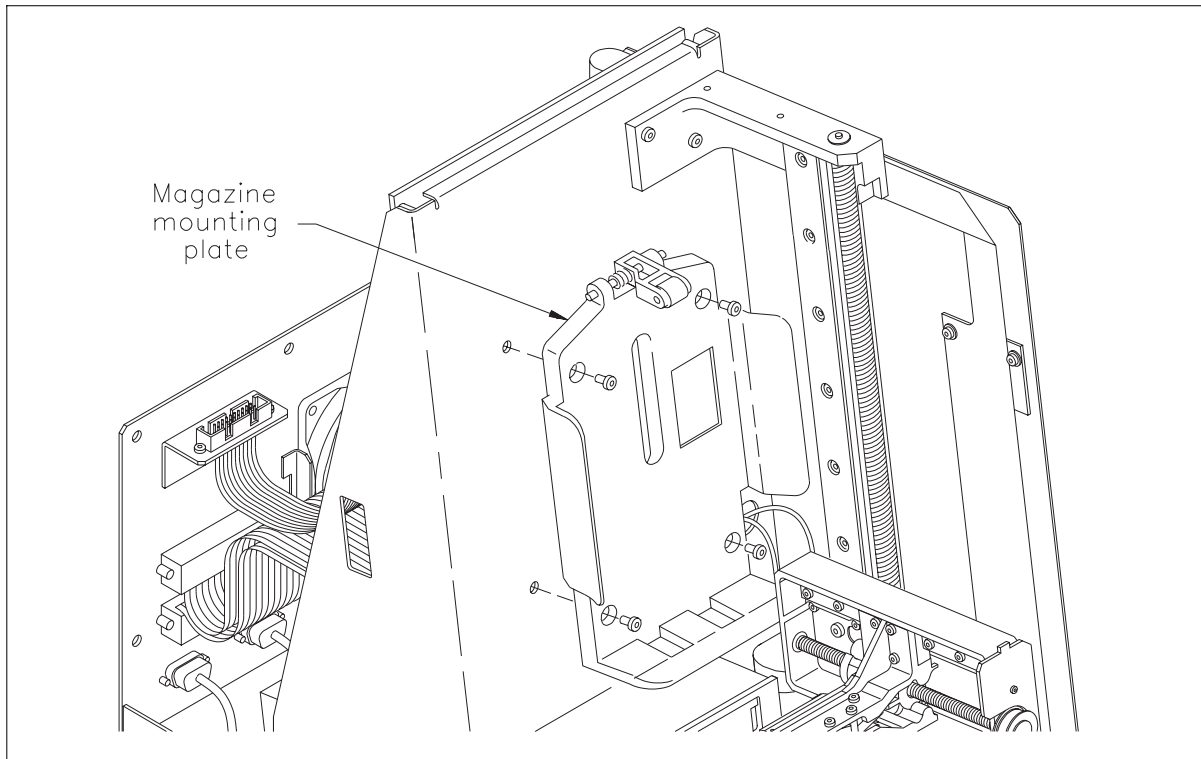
Removing the magazine mounting plate (library shown without cover for clarity)
